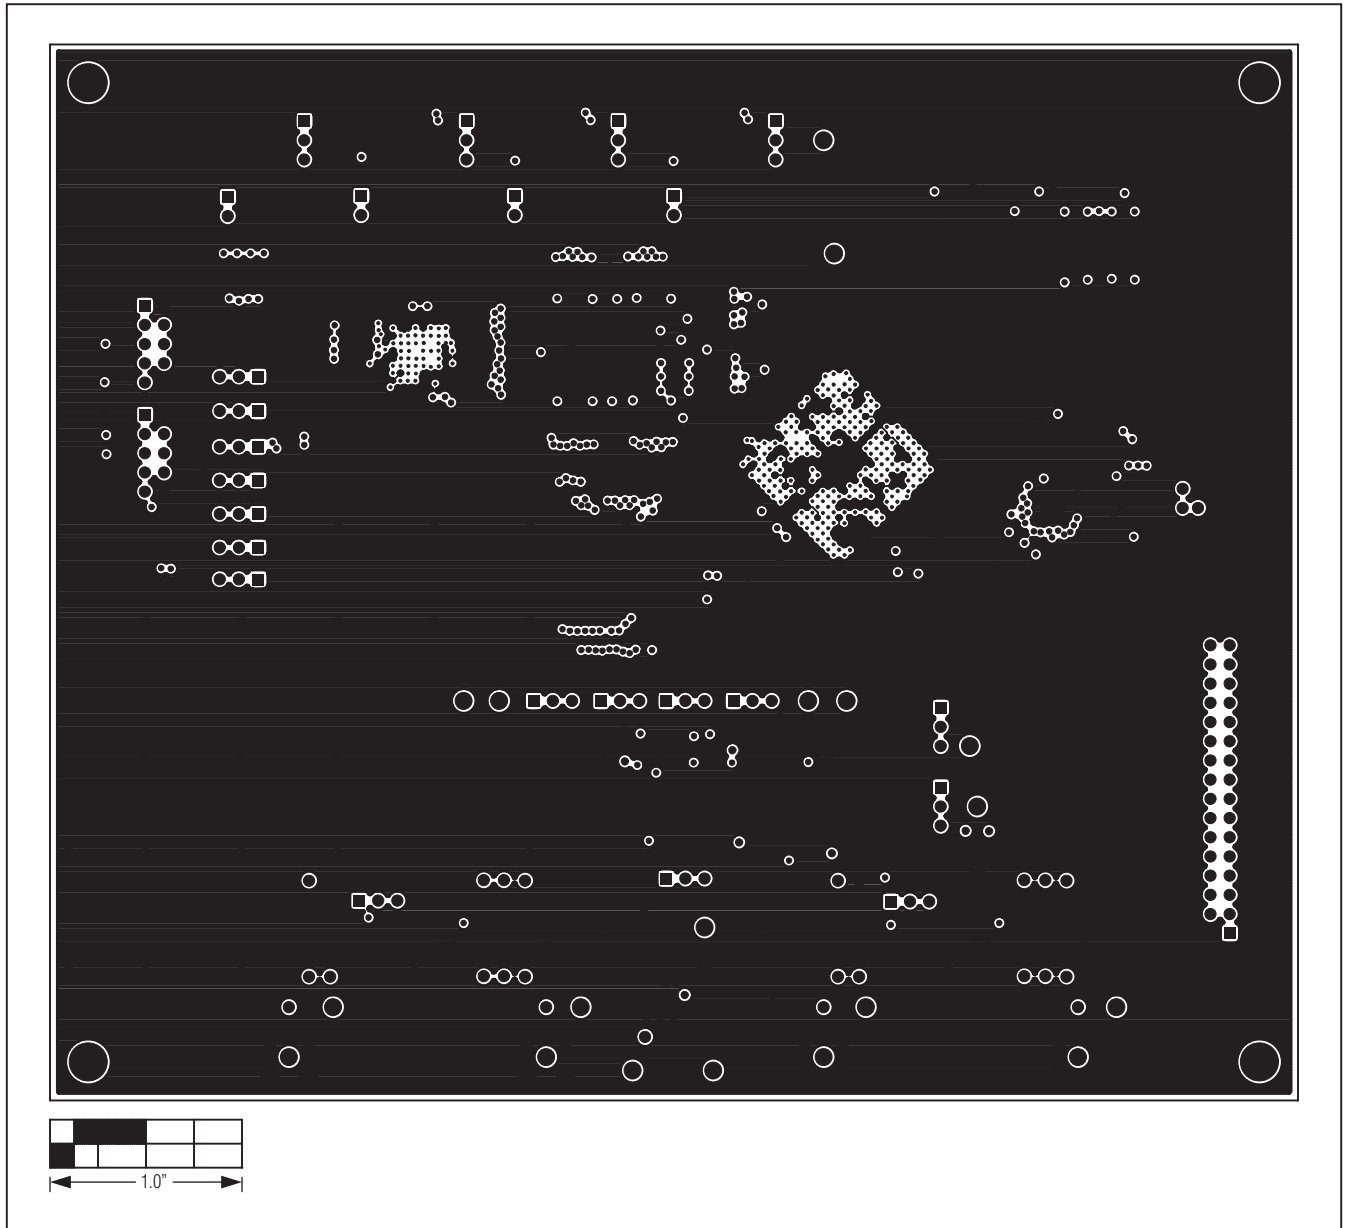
MAX11666 EV Kit PCB Layout—Layer 2
